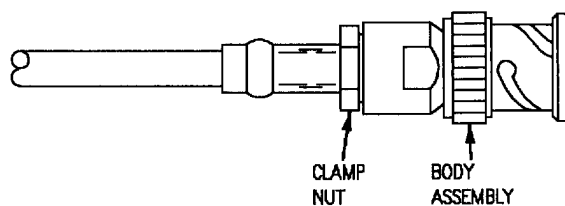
31-33449-XX and 5801-XXXX Twinax Connector Repair (Sheet 2)
